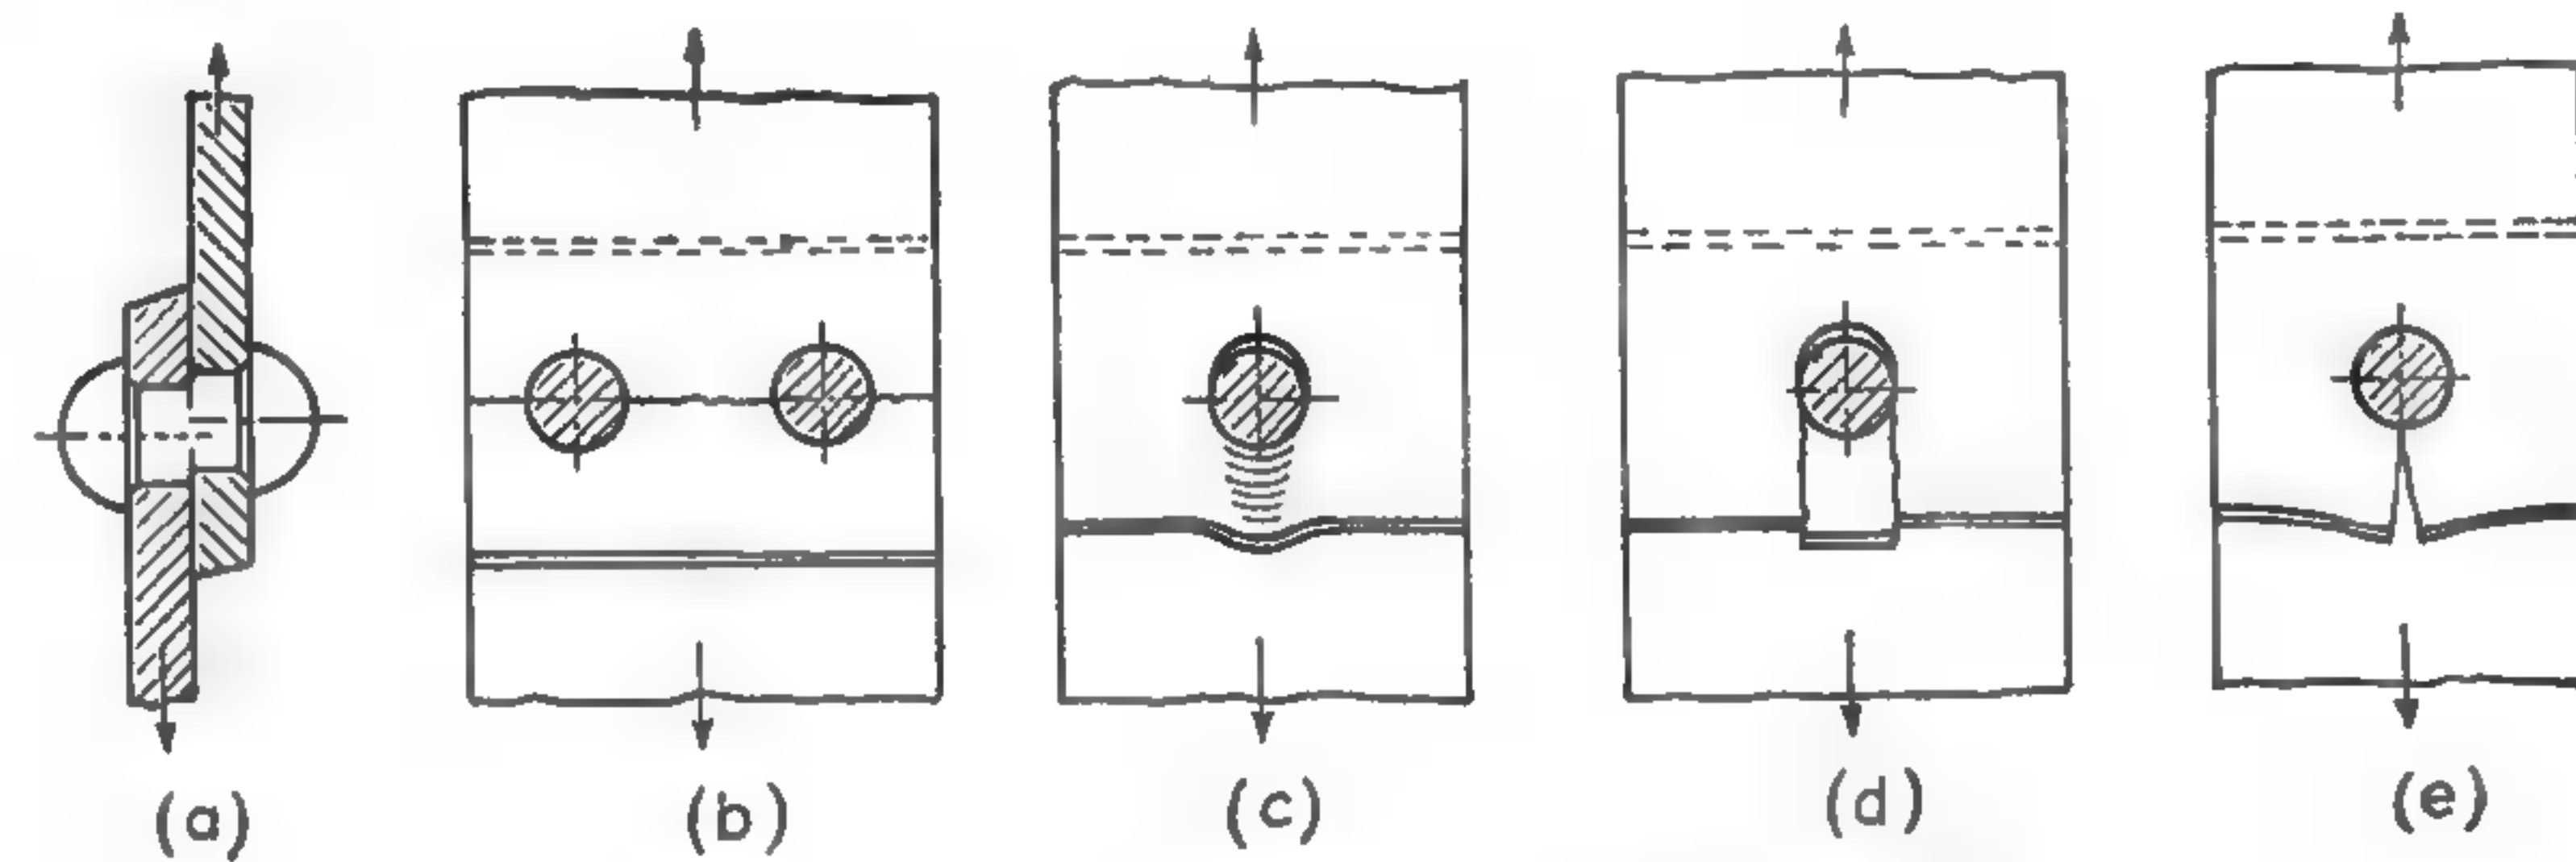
Ways of failure of a riveted joint.
